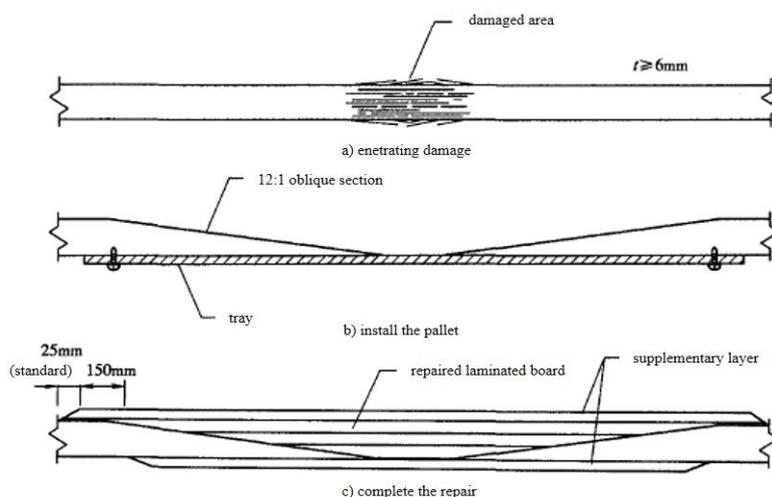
(5) Single-sided patching with a thin laminate as a backing pad
